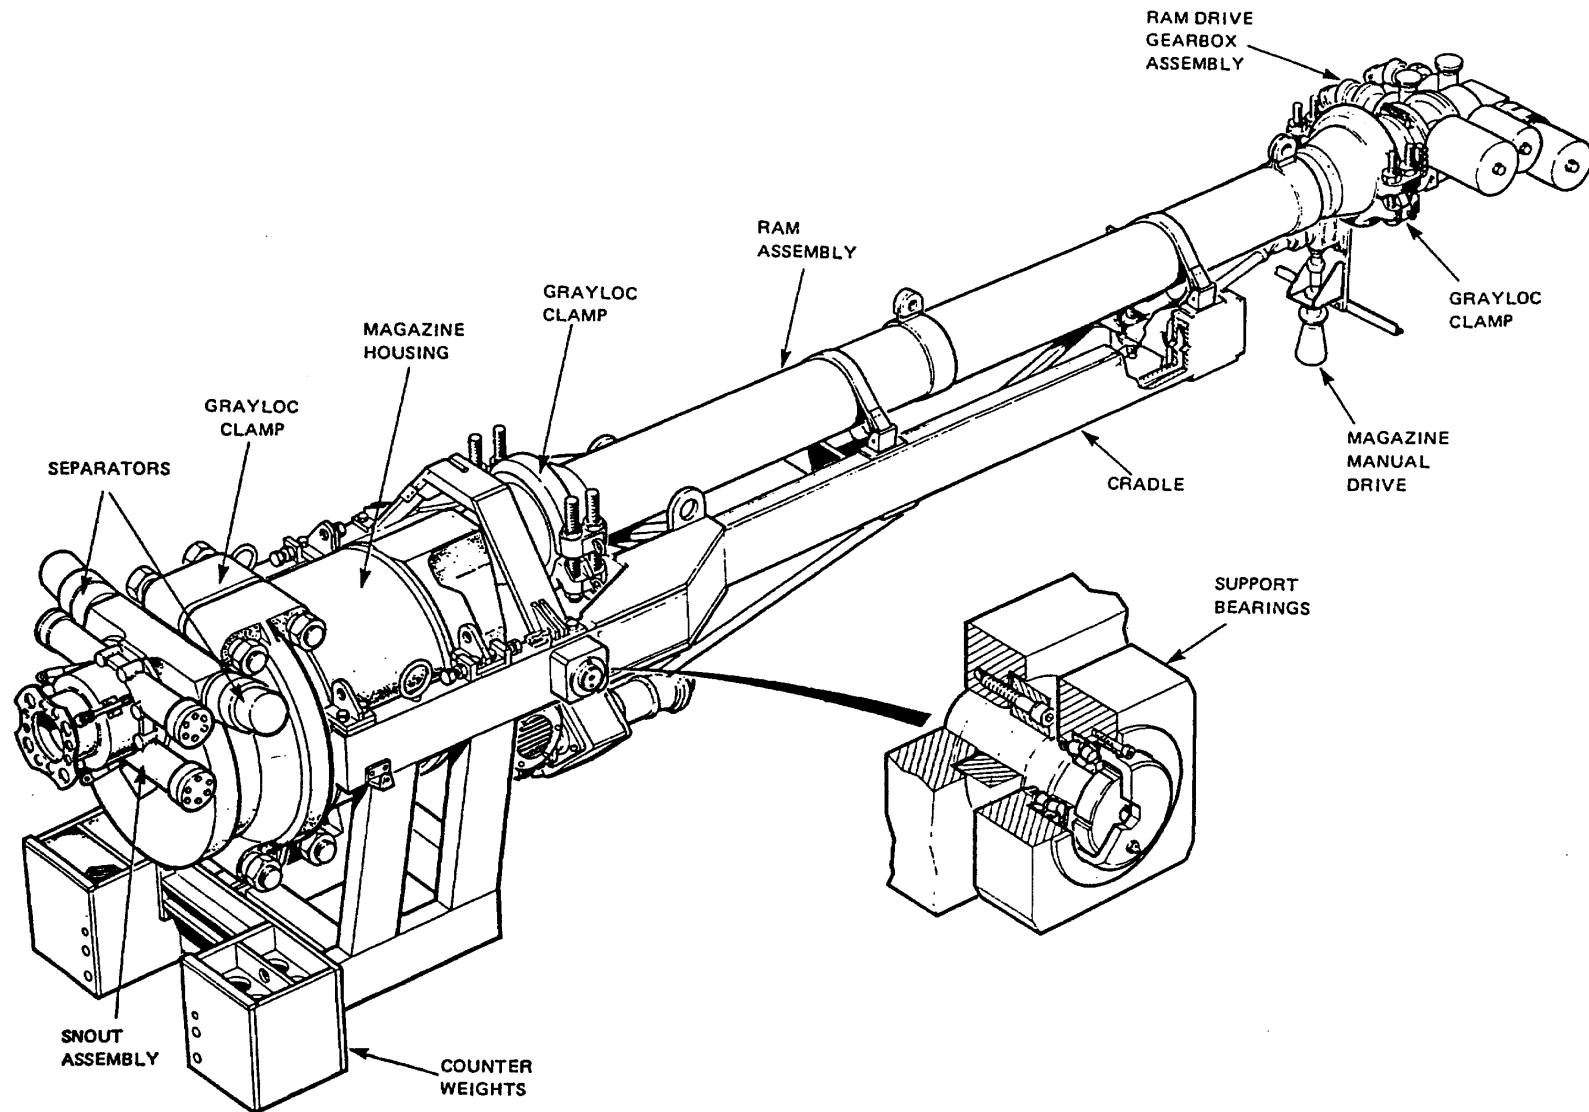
Fueling Machine Head and Support Cradle Assembly
